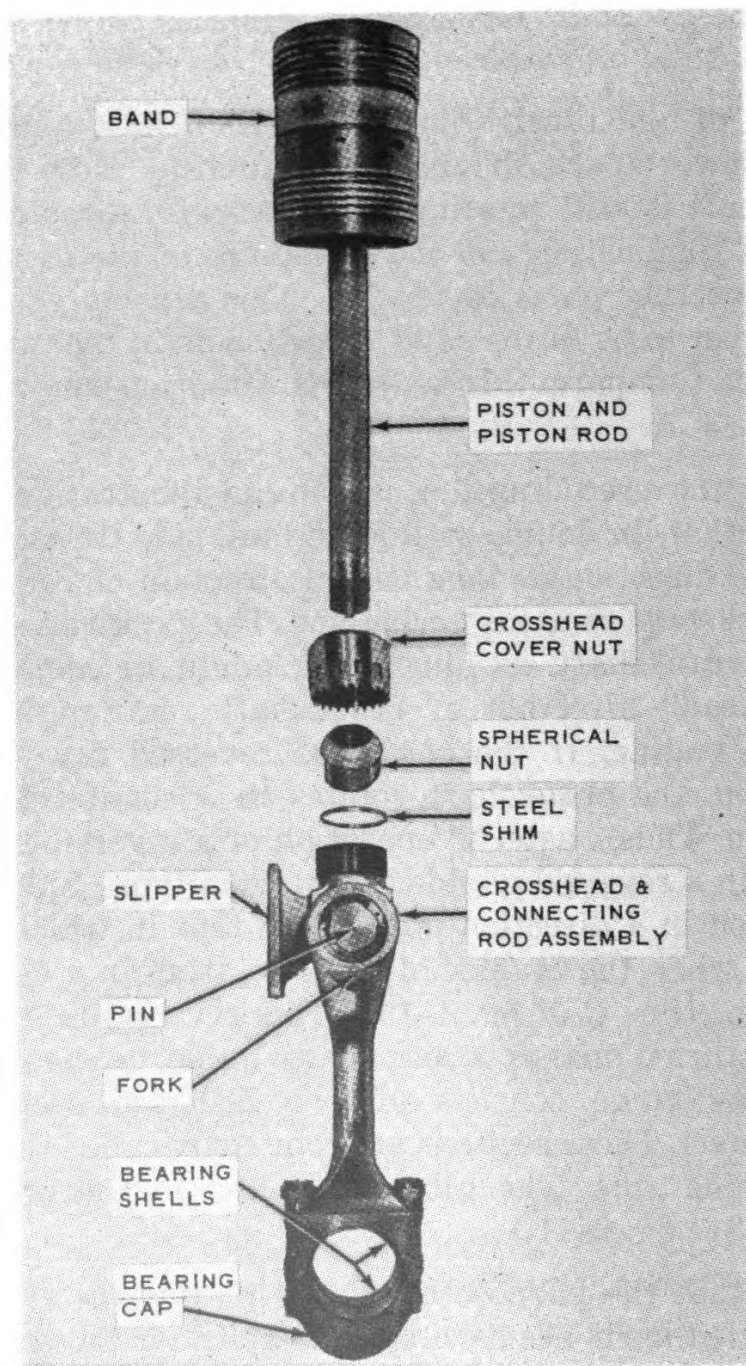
Crosshead piston and rod assembly (Hamilton).
